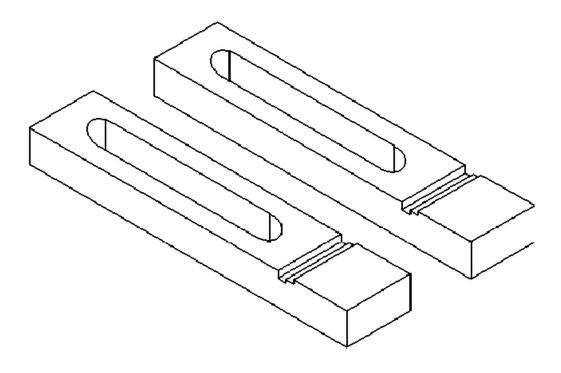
Crankshaft Main Bearing Remover C-3059 Courtesy of CHRYSLER LLC
